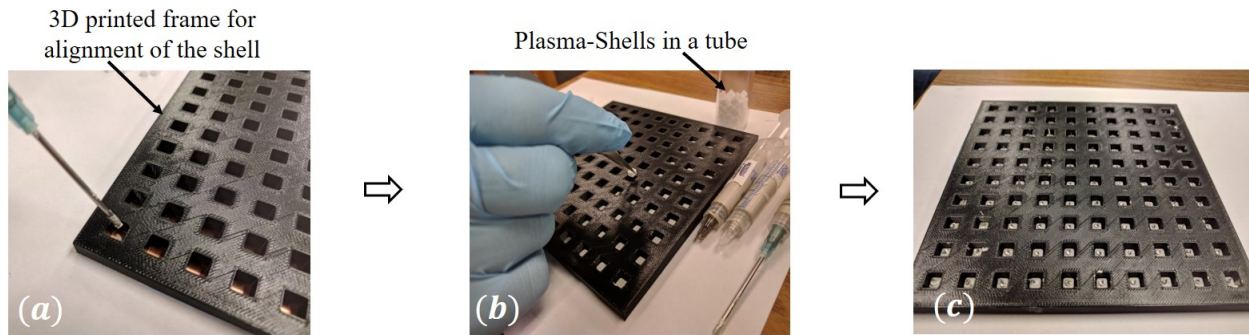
Fabrication process. (a) Conductive silver epoxy deposited on ground plane using a syringe. (b) Shells manually placed in holes of 3D printed frame. (c) Conductive silver epoxy also deposited on top side of shells before assembly.
